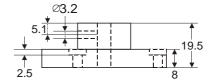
KF21, KF31 mounting flange dimensions (in mm)
